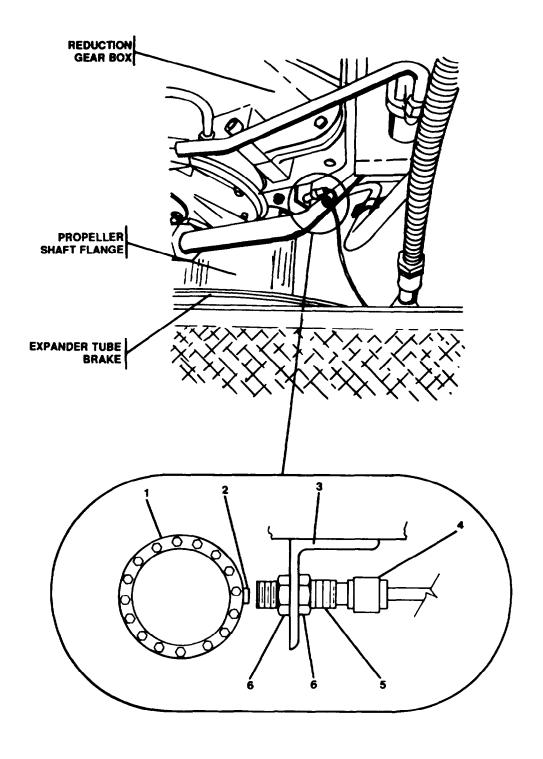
Electrical Self Generatine (Shaft) Tachometey.
